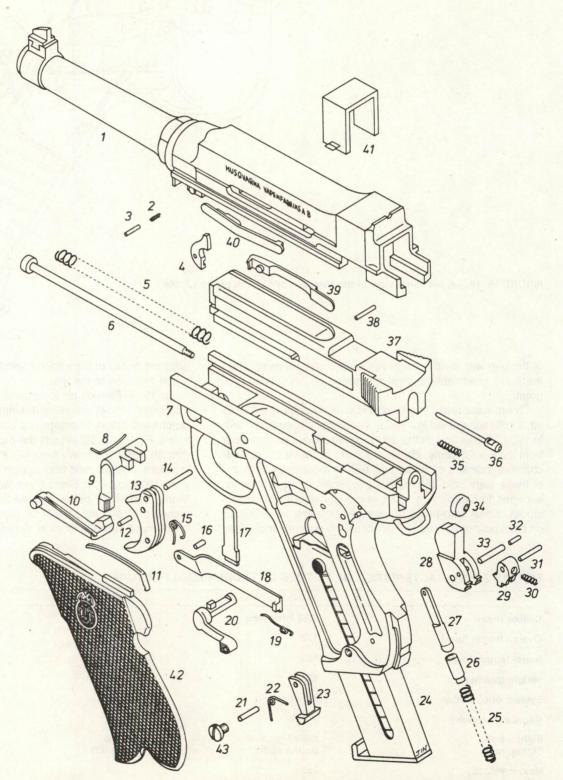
Exploded view of the Swedish m/40 9mm Parabellum Lahti L-35 self-loading pistol. (Jimbo)
